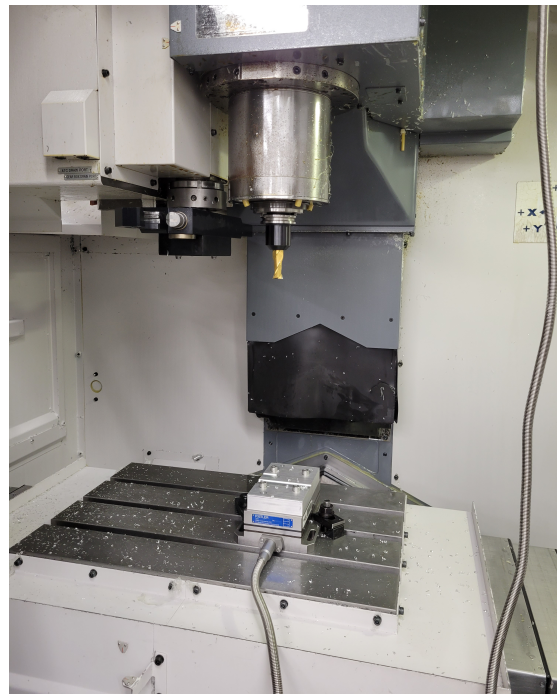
The dynamometer and calibration workpiece mounted inside the CNC machine.
